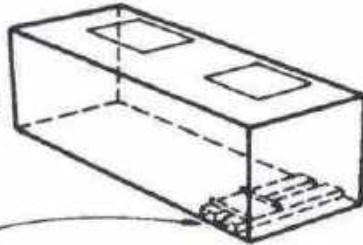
Shipping Location for Motor Mounting Assembly - NE240
